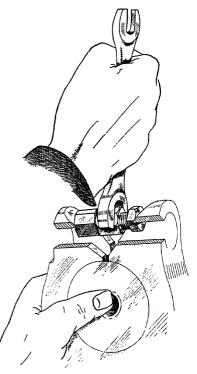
Showing application of Expanding tool in the "vee" of rear half crankshaft.
